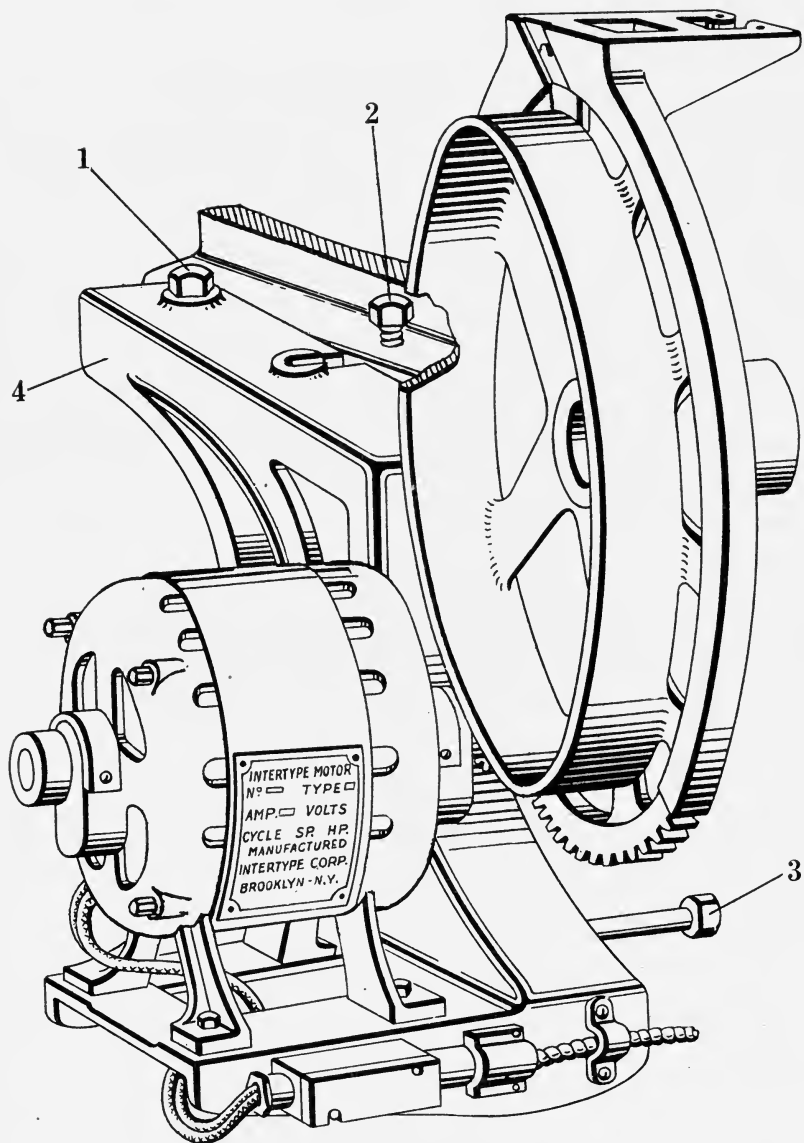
An Intertype Pinion-Drive Motor, showing method of mounting it upon a bracket attached to the machine base.
